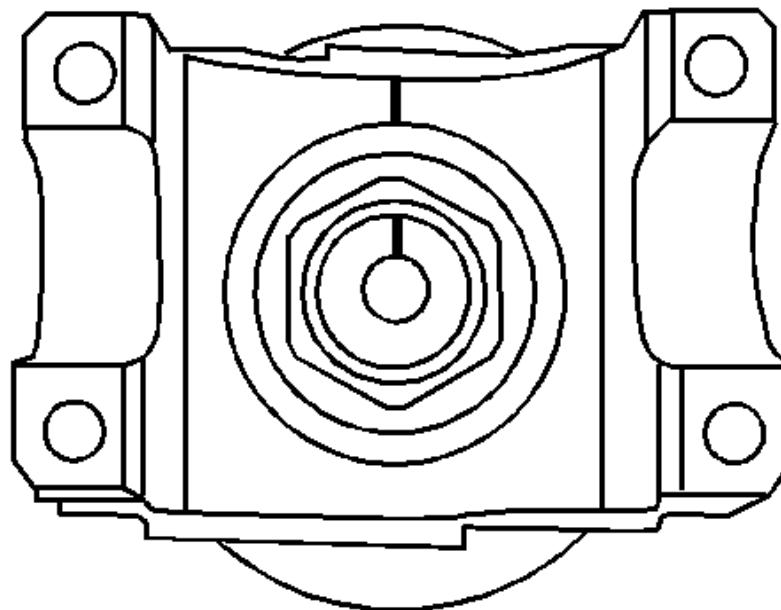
View Of Pinion Shaft & Pinion Yoke Alignment Marks
